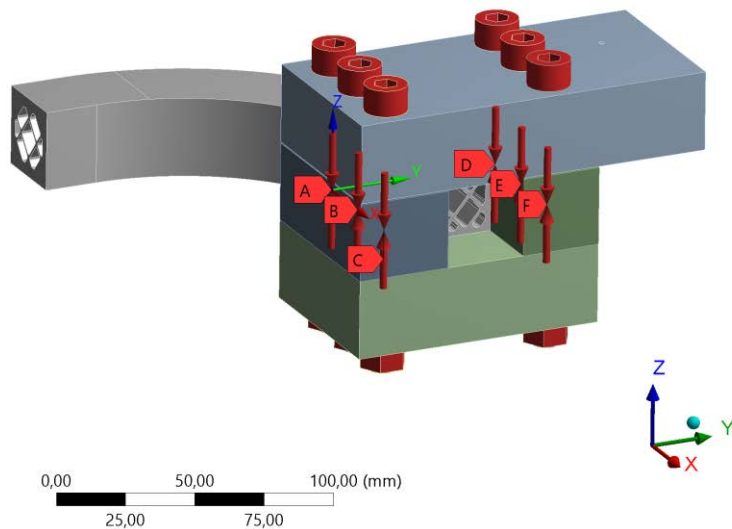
Preload applied to all the six bolts that are present in the load clamp assembly.
